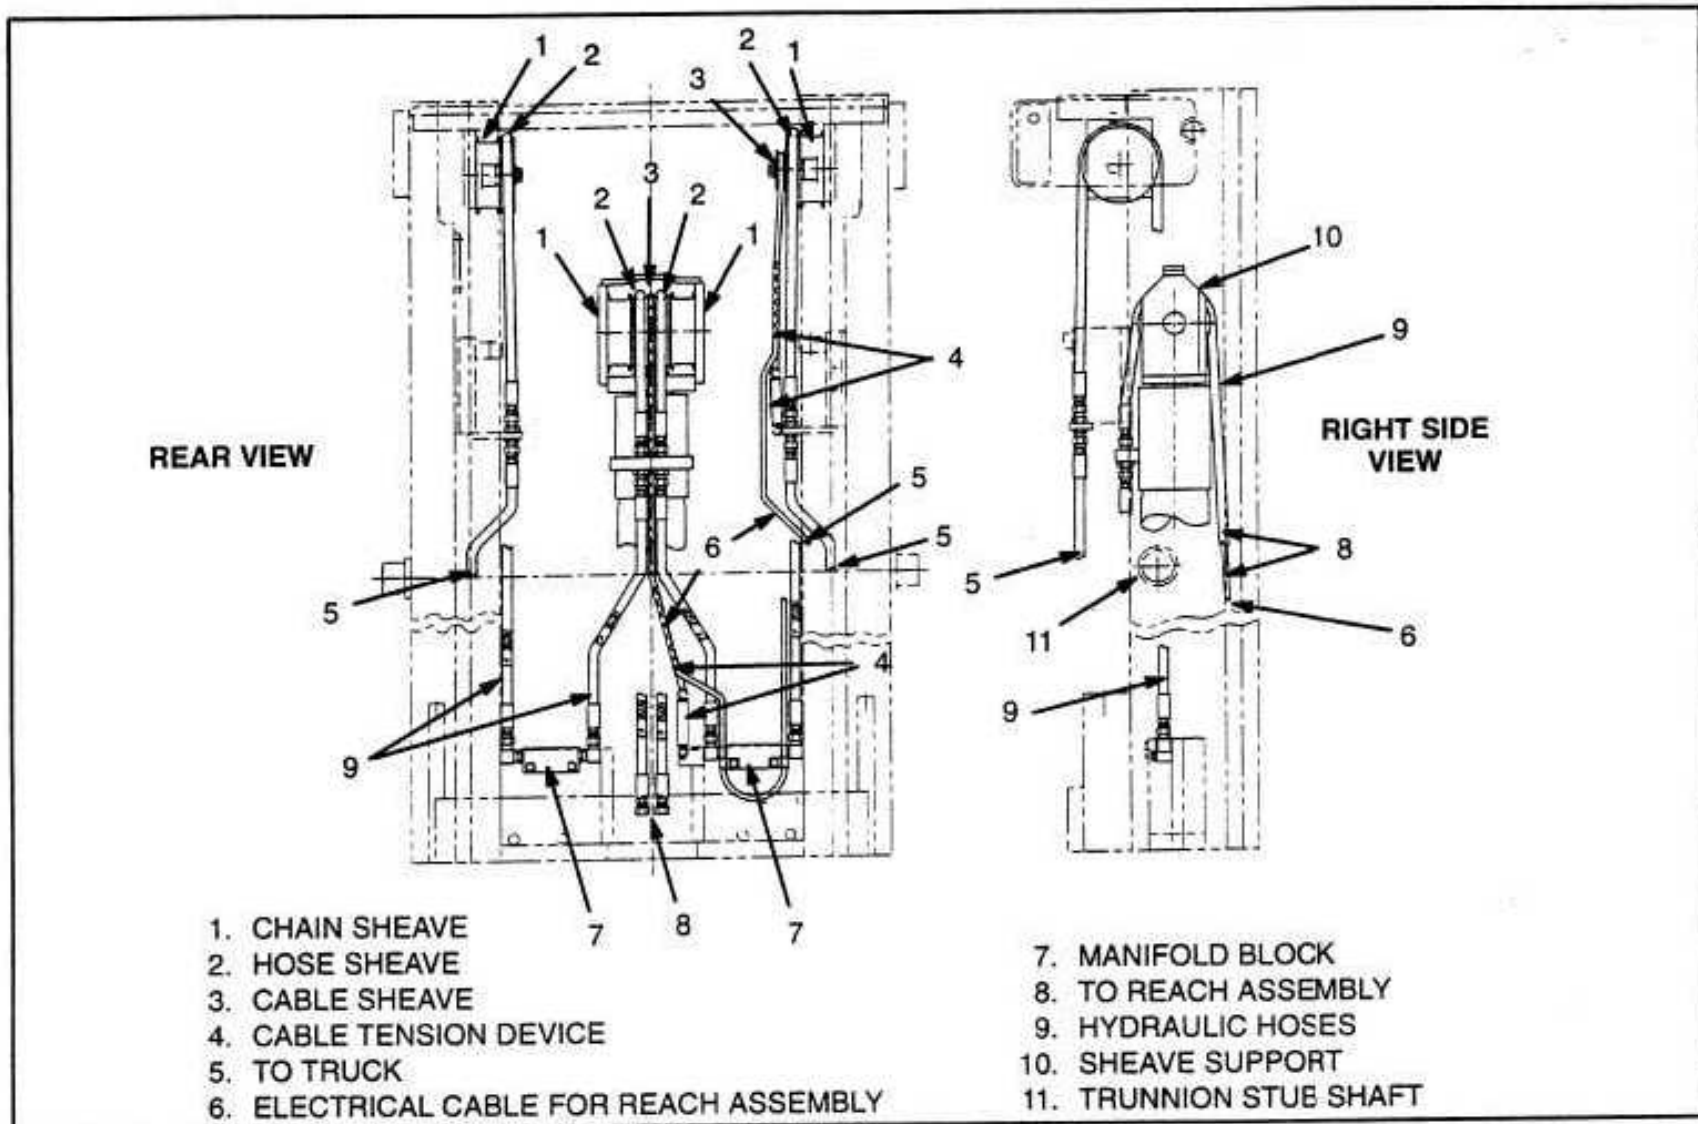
Triplex Hose Routing for Sideshift or Reach Carriage
